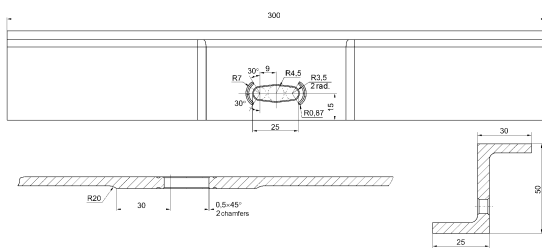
Stringer with Holes Giving Oval Shape Processed by Stamping Craters of Segment Shape Test-Piece
